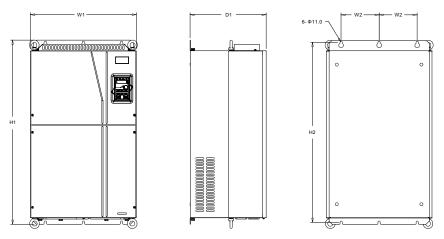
Wall-mounting diagram of inverters of 400 V, 132 to 200 kW
